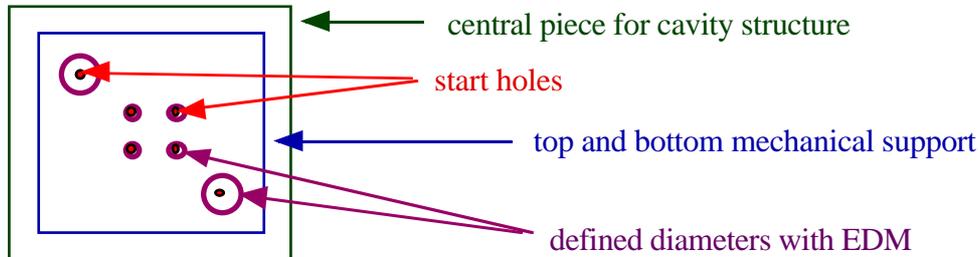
Step 2. Start holes and holes for screws and alignment pins.
